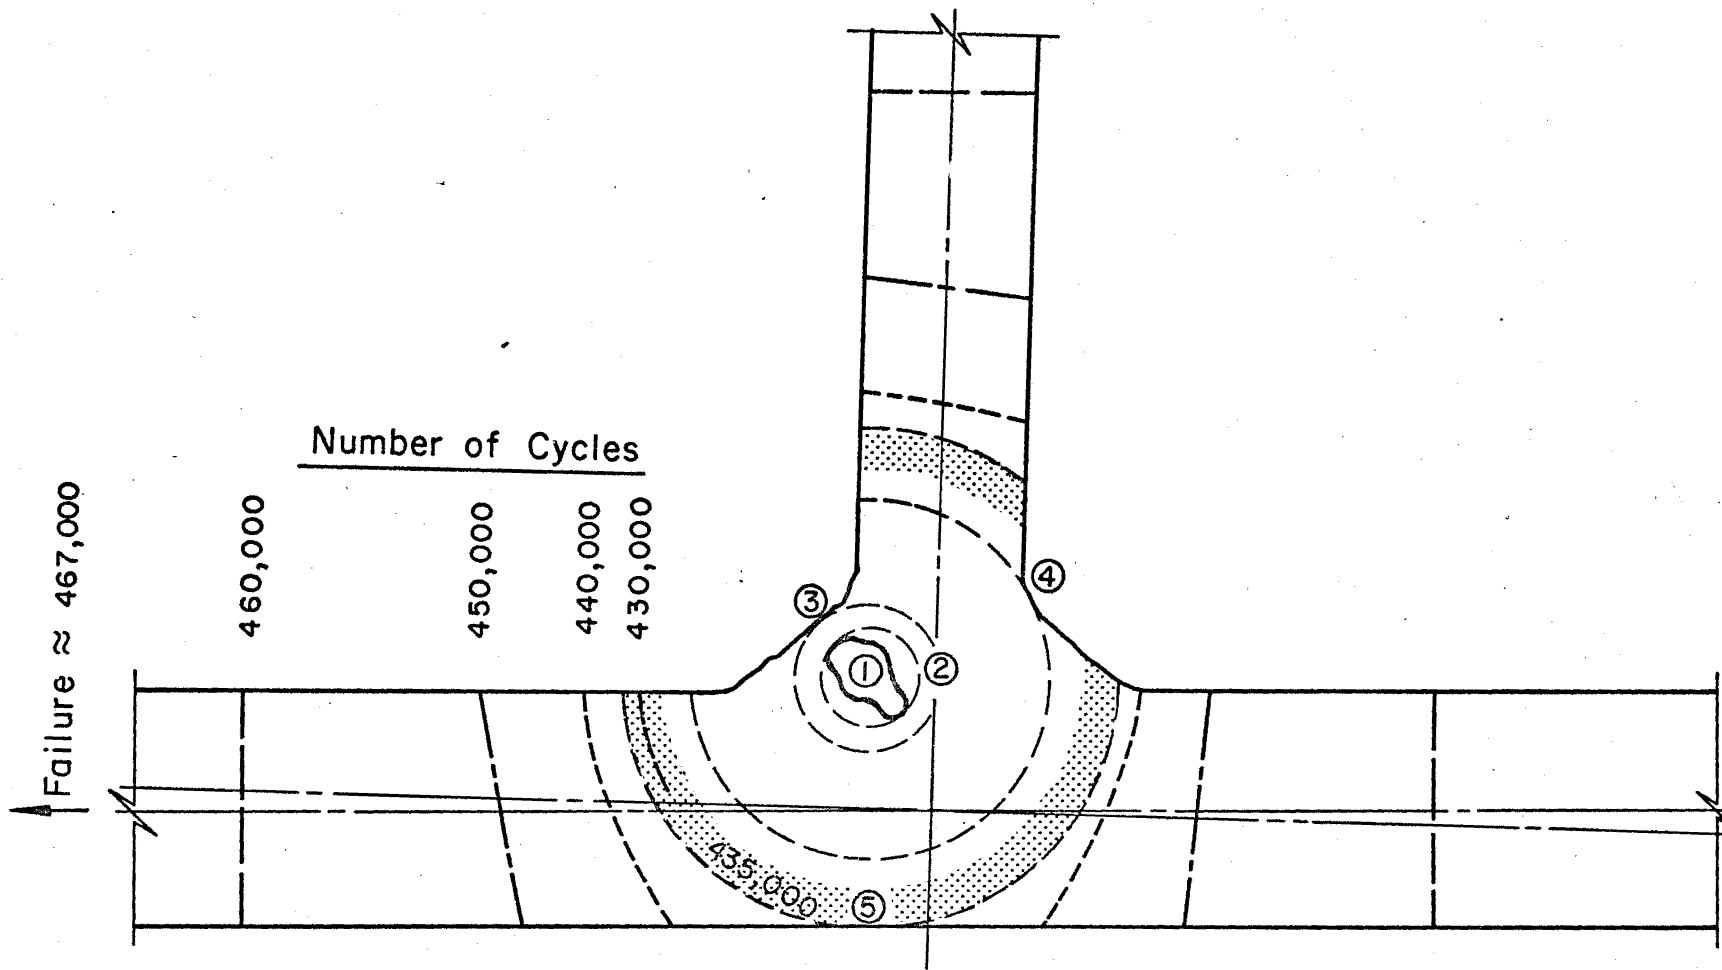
Schematic of the stages of crack growth from a pore in the fillet weld
